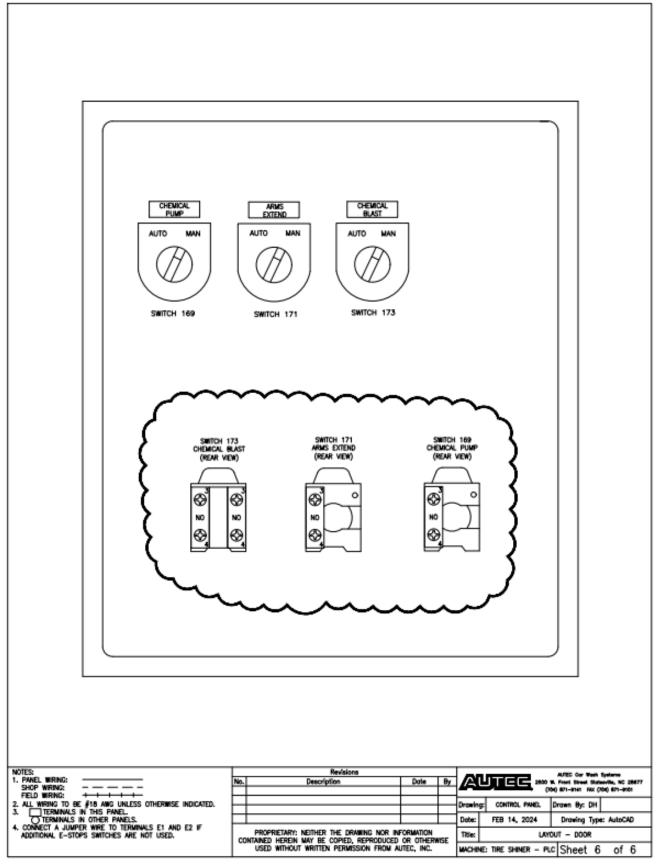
CONTROL PANEL DOOR LAYOUT
